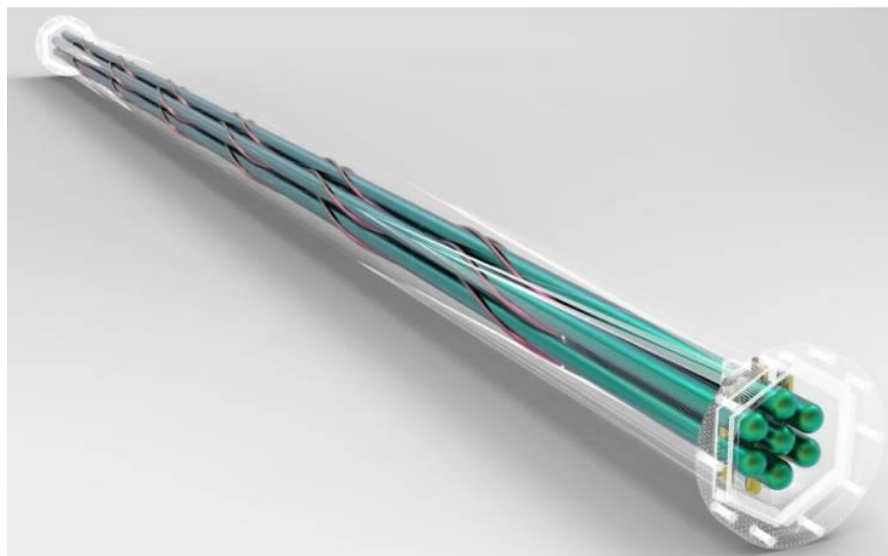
Overall view of hexagonal fuel pin assembly as to be manufactured
